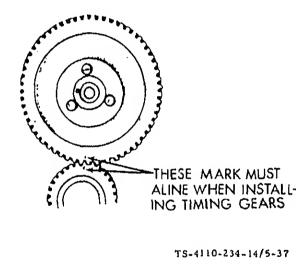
Timing Gear Removal and Installation F10000RG-2
